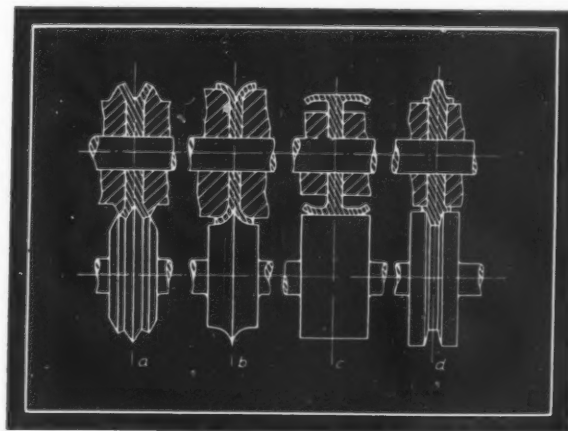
Successive operations may be employed to form the flange further and secure better parts
